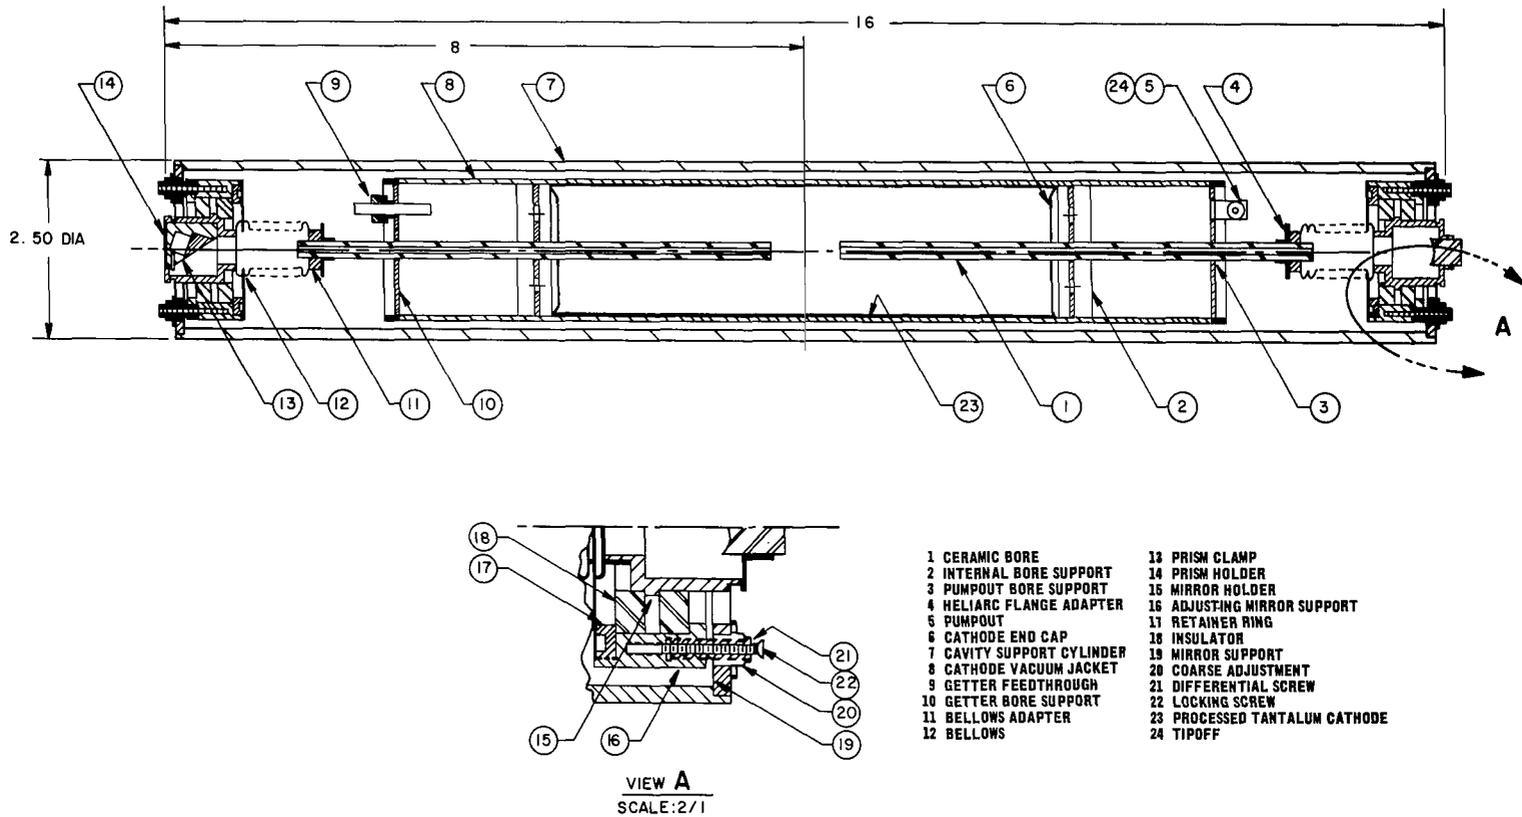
Drawing of helium neon laser designed for space use. (The laser and its power supply will be packaged in a pressurized, hermetically sealed container with dimensions 5x5x16 inches)
